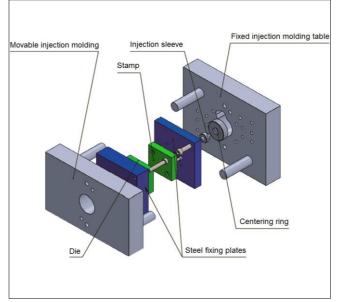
Complex injection mold with the injection molding table used for testing. Green objects are mold inserts printed using the FDM/FFF method, and navy blue – steel fixing plates
